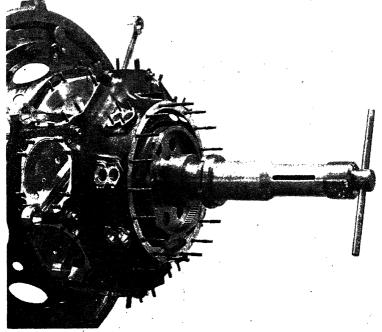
Dismantling cam sleeve together with crankshaft sleeve from crankshaft front end.
